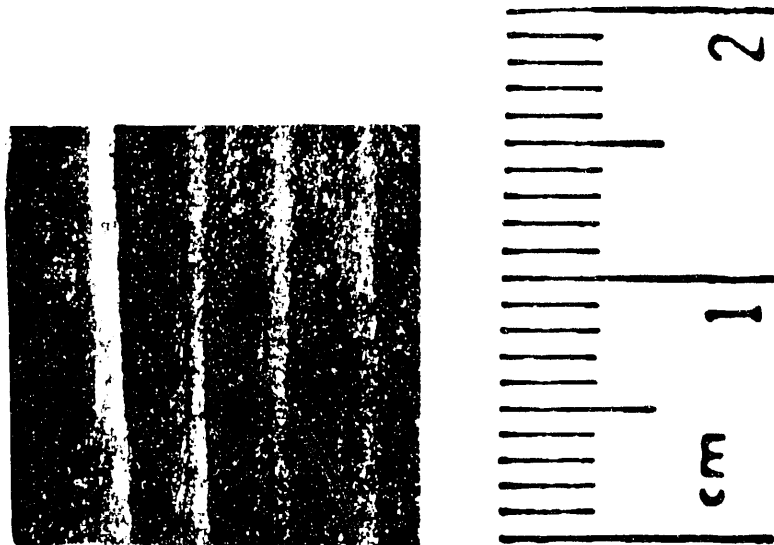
A photograph (top view) of the nickel base (C22) weld overlay coating sample (0.5 inch x 0.5 inch) for erosion testing. Coating was deposited on 1018 steel substrate.
